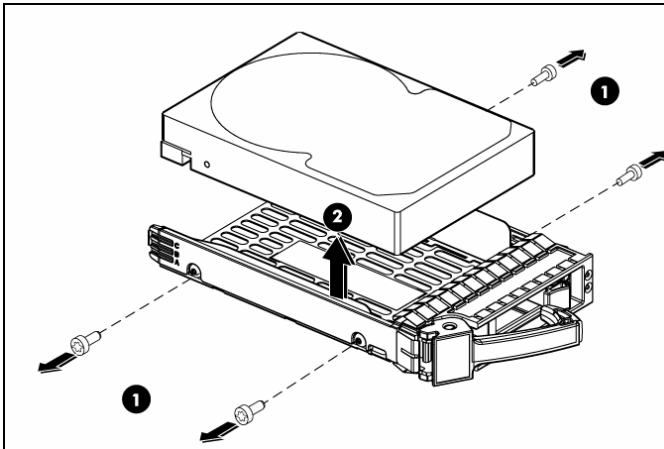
Removing a SAS or SATA hot-plug hard drive
